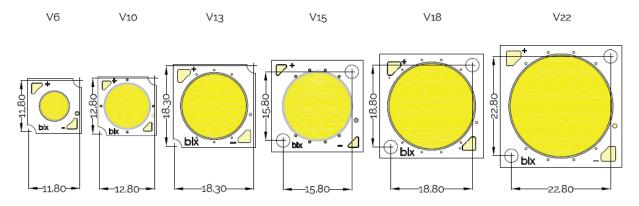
Mounting Locations for securing LED arrays to Mounting Surface (dimensions are in mm).
